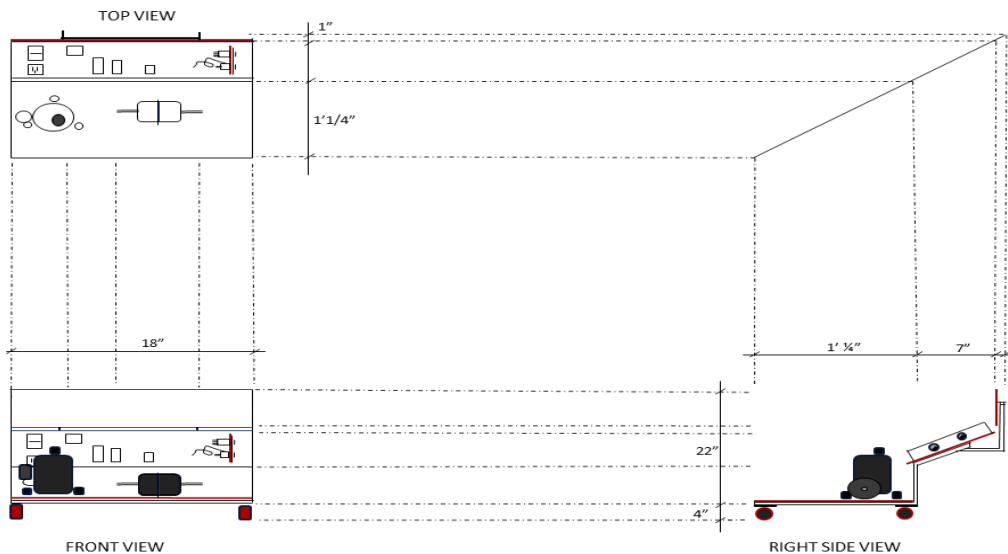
Project Drawing Plan Such As Dimension and Other Important Details
